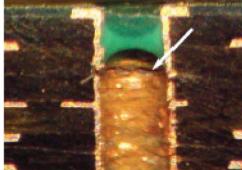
This cross-section image of a PCB via shows a crack that caused an open circuit. Stress, contamination, or insufficient plating might have caused the crack.
